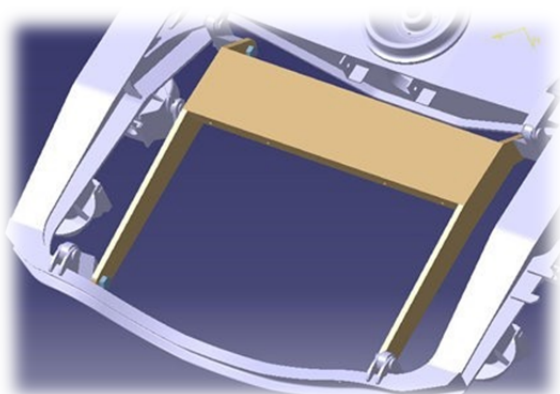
Attachment of the designed beam of a disc brake on a bogie frame
